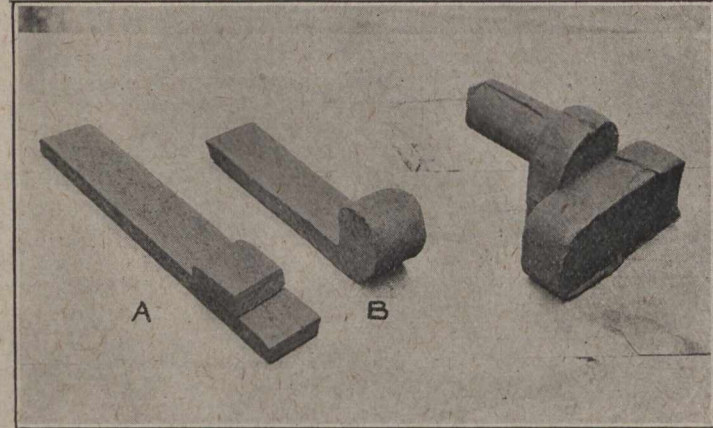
Hinge and Link Block Produced on the Forging Machine.
